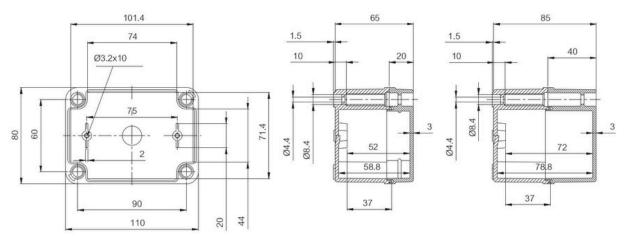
Housing dimensions (in mm). Note: Drawing not including cable gland, radiation shield and sensor.
